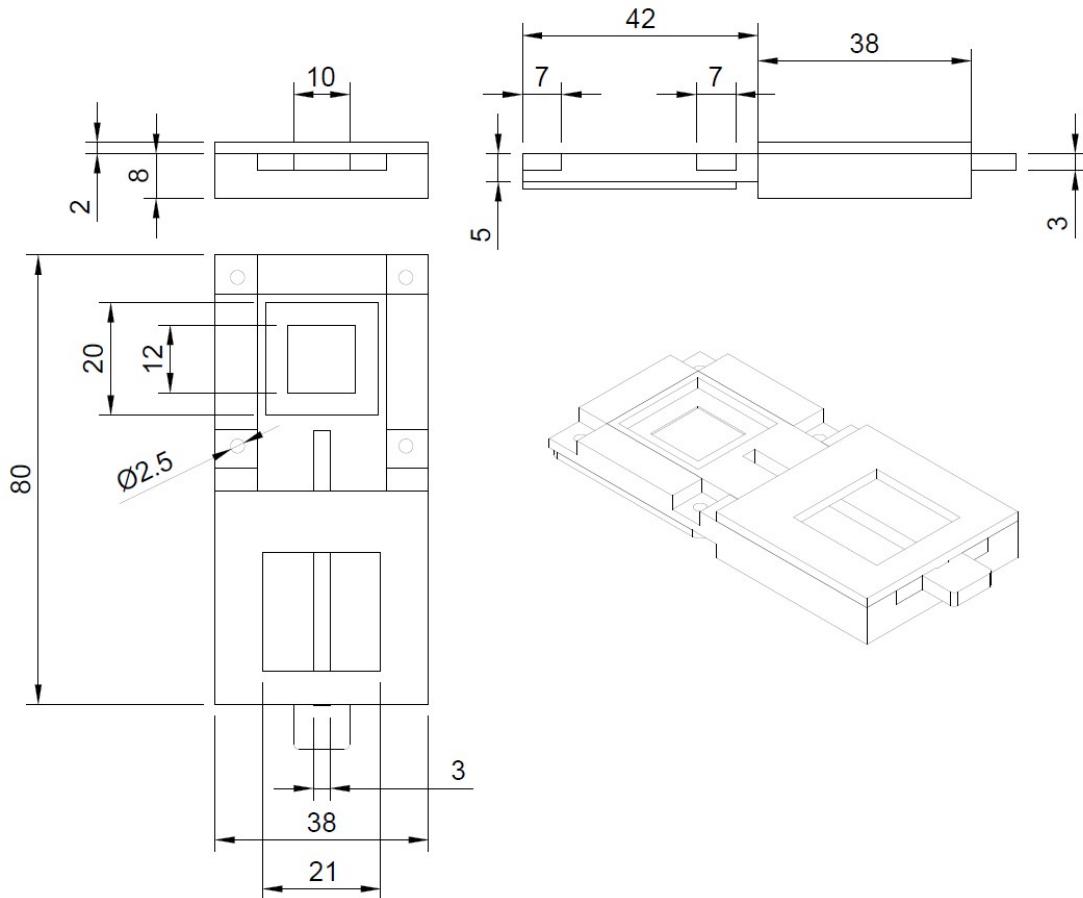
Mechanical drawing of the slide mount part. Dimensions shown are in mm.
